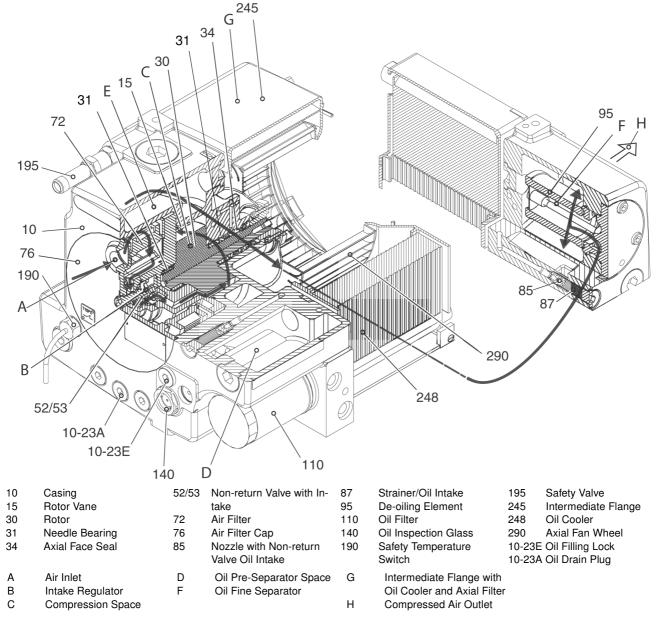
Assembly of rotary compressor from series ROL Type M
